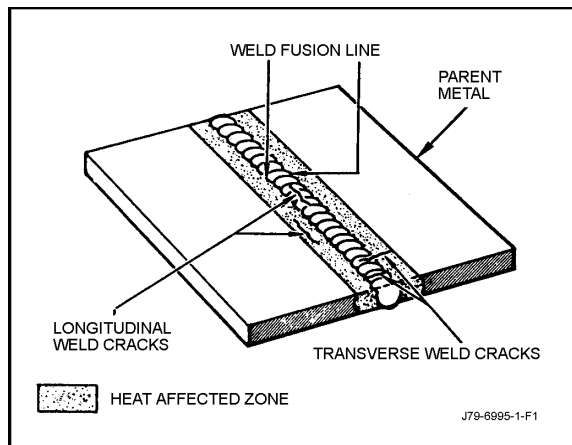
Weld Heat Affected Zone and Weld Crack Definition
